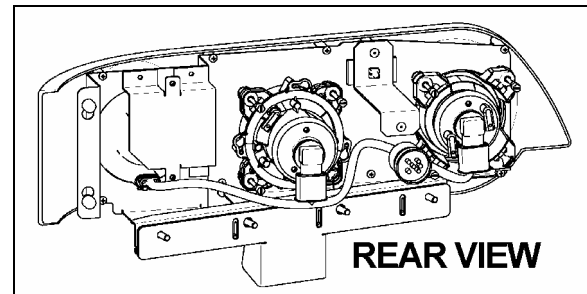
HEADLIGHT ASSEMBLY REAR VIEW 06548
